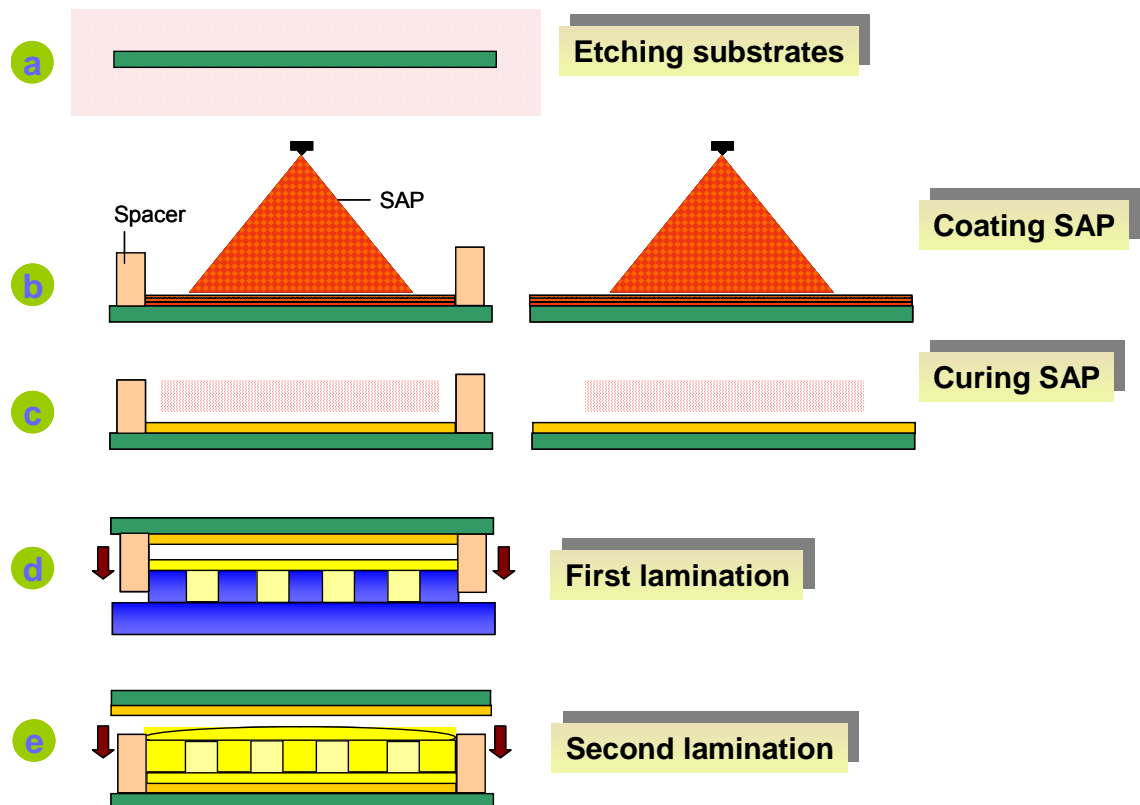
EOCB fabrication combining with SAP technique and boards etching
